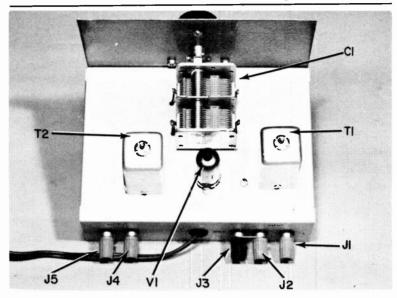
Compare this photo with the top view drawing in Fig. 7-2. Parts placement is critical to satisfactory operation. Booster can be installed in a cabinet if desired.
